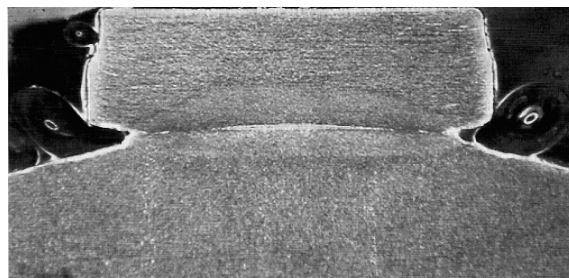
A photograph of a cross section of a weldment between an endplate and an endcap (magnification 50).
